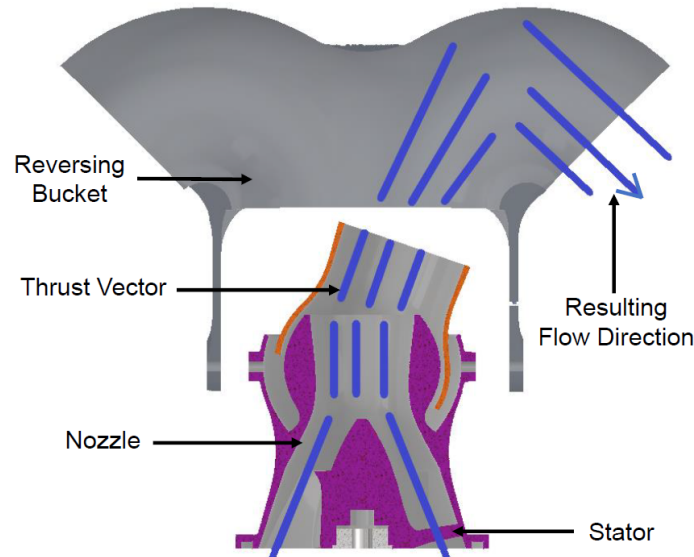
A cross-sectional view of the thrust vectoring system when the reversing bucket is lowered.
